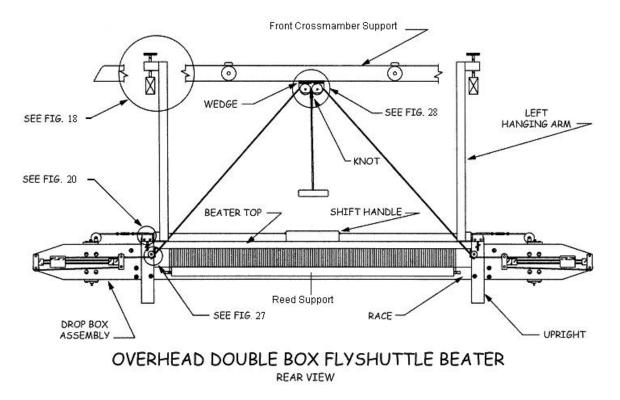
Overhead Double Box Flyshuttle Beater Assembly - Rear View
